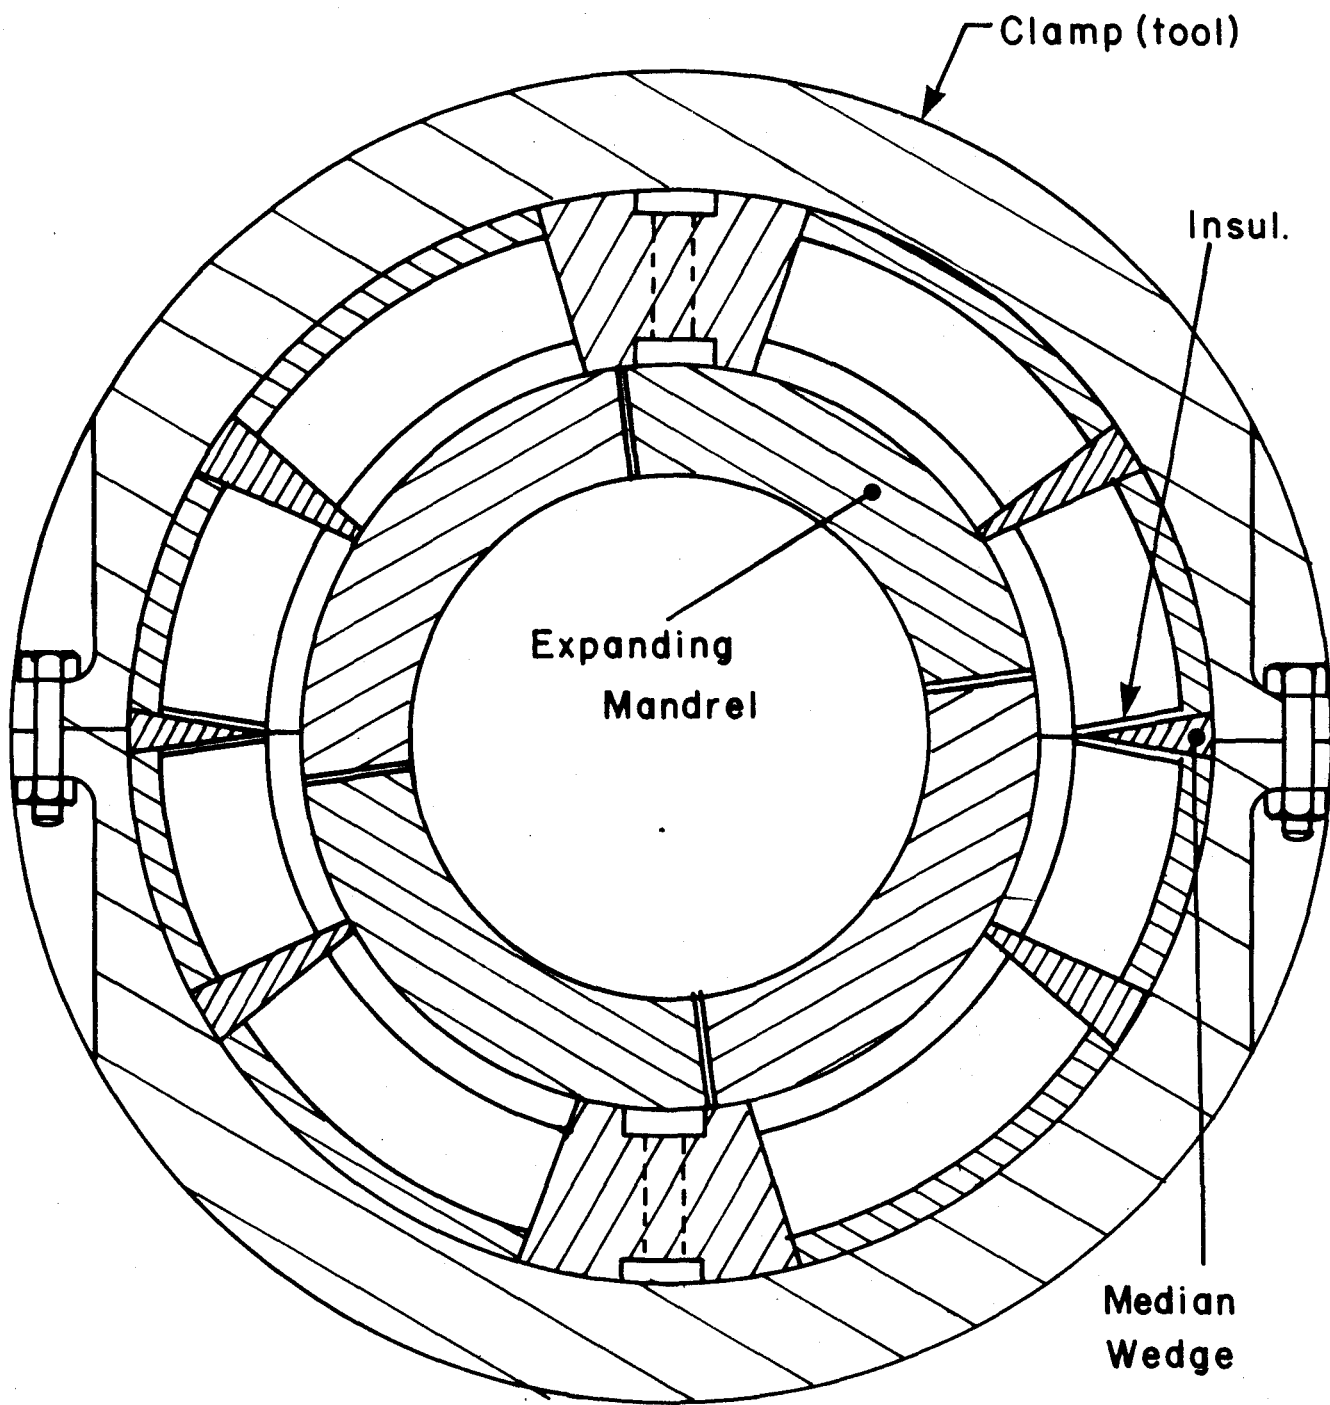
Assembly of Two Coil Halves, with Expanding Mandrel Inside and Temporary Clamps Around Outside
